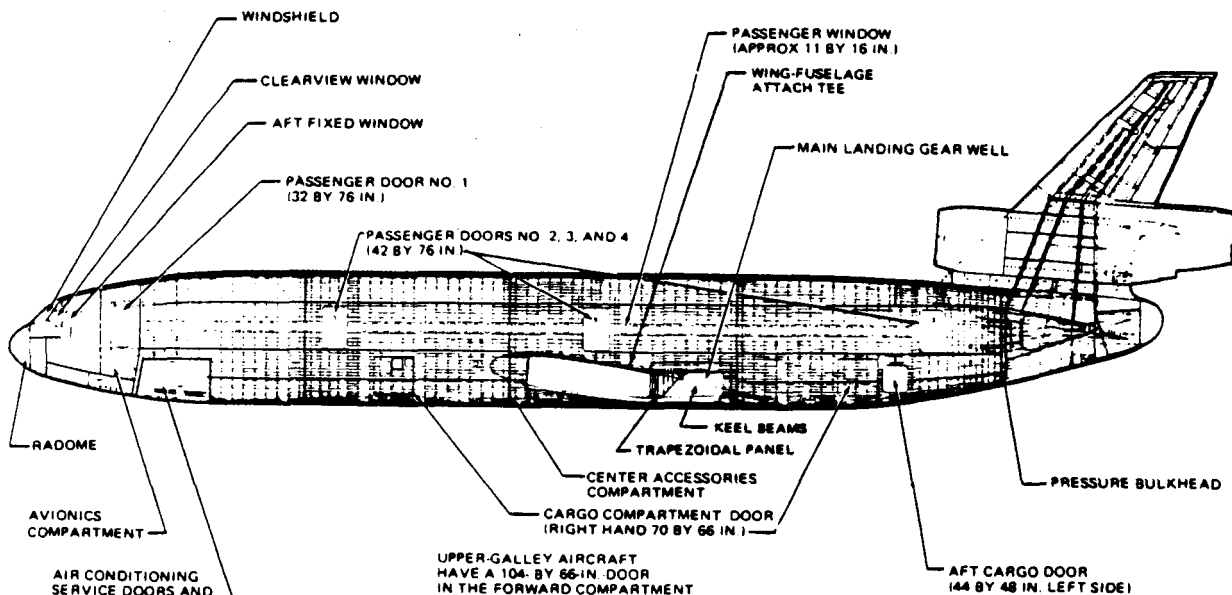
PRELIMINARY DESIGN DRAWING
